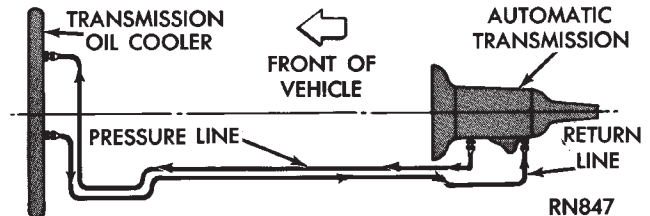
Oil Flow to Cooler—Top View (Typical)
